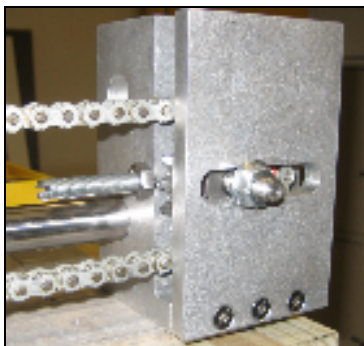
,b: Drive Sprocket with Tensioner, Sprocket Housing
